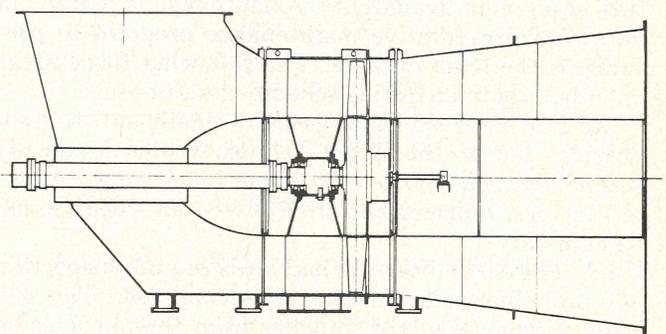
Sectional of an horizontal installation mechanical draft axial flow fan
